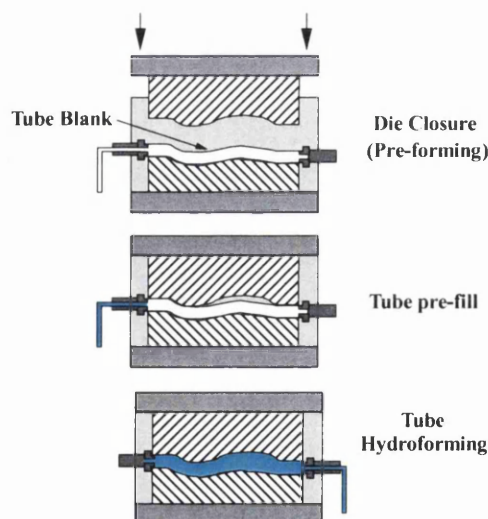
Schematic illustration of the tube hydroforming process (no end feed)
